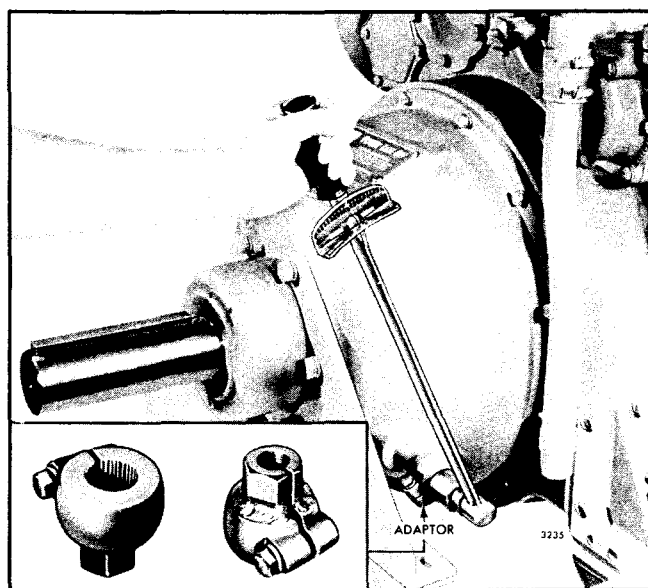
Checking Power Take-Off Clutch Adjustment with Torque Wrench and Adaptor
